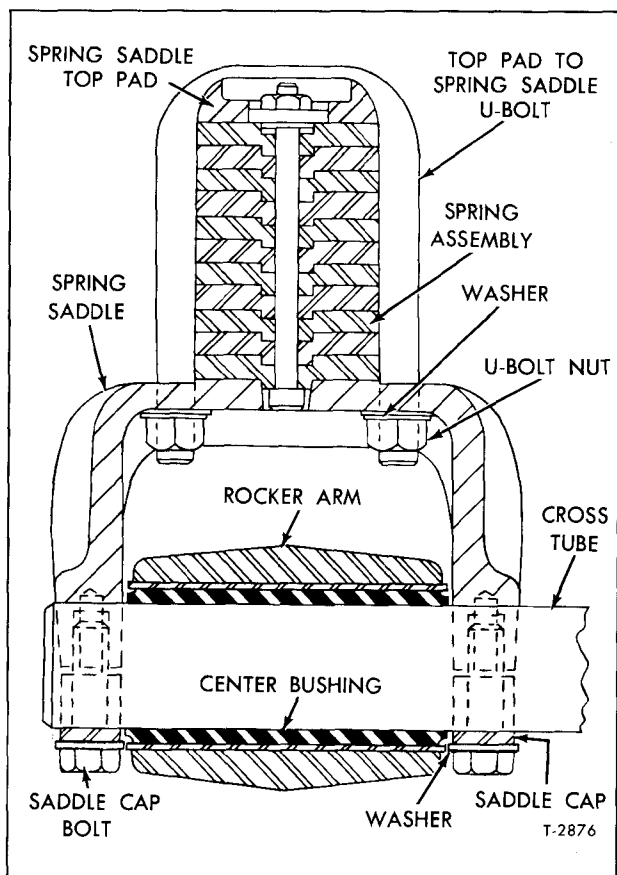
Section Through Spring Saddle and Beam (RU Type Suspension)
